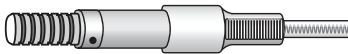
Final Layout of the silicon sleeve over the IPG and Lead Receiver
